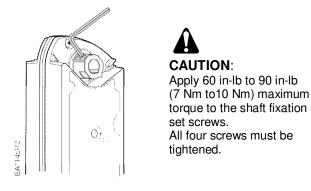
Fasten the Shaft Adapter to the Damper Shaft.
